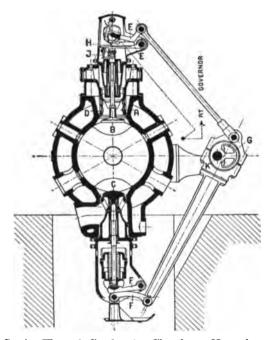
Section Through Combustion Chamber. Nuremberg Gas-engine.
